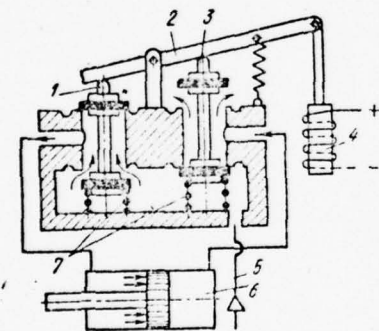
Diagram of pneumatic actuator with valve distributor.
